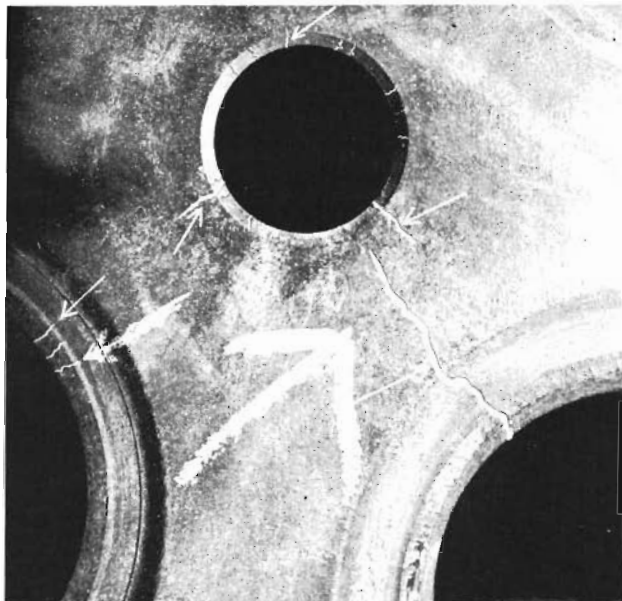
Magnaflux Indications At Injector Well And Valve Faces
